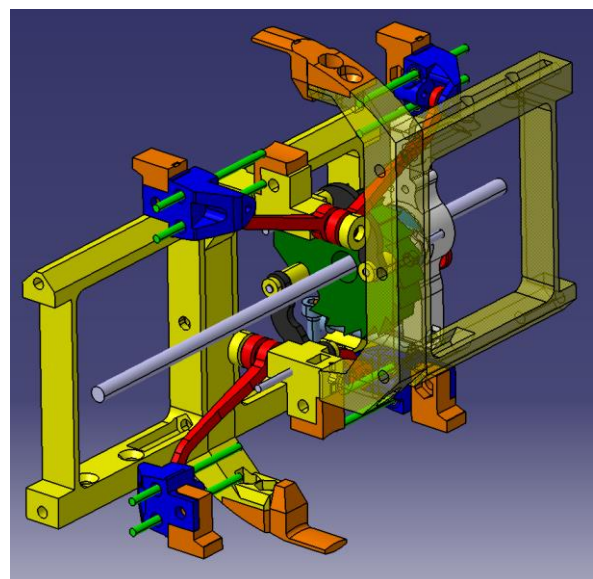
Detailed view on inner mechanisms driving the flange interfaces
